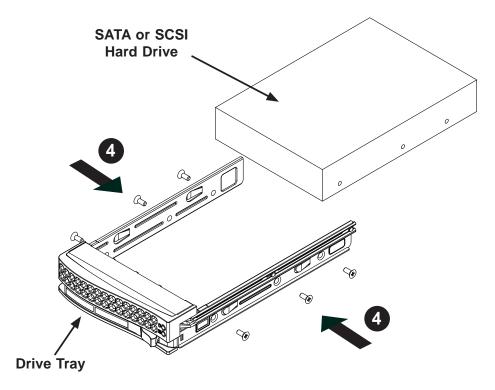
Installing the Hard Drive into the Hard Drive Carrier
